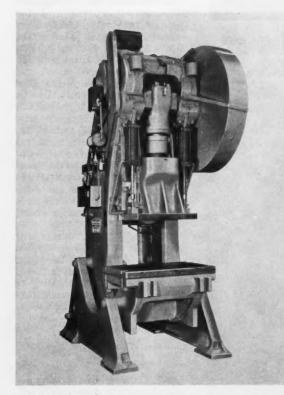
Cleveland single-geared inclinable press with counterbalanced slide
